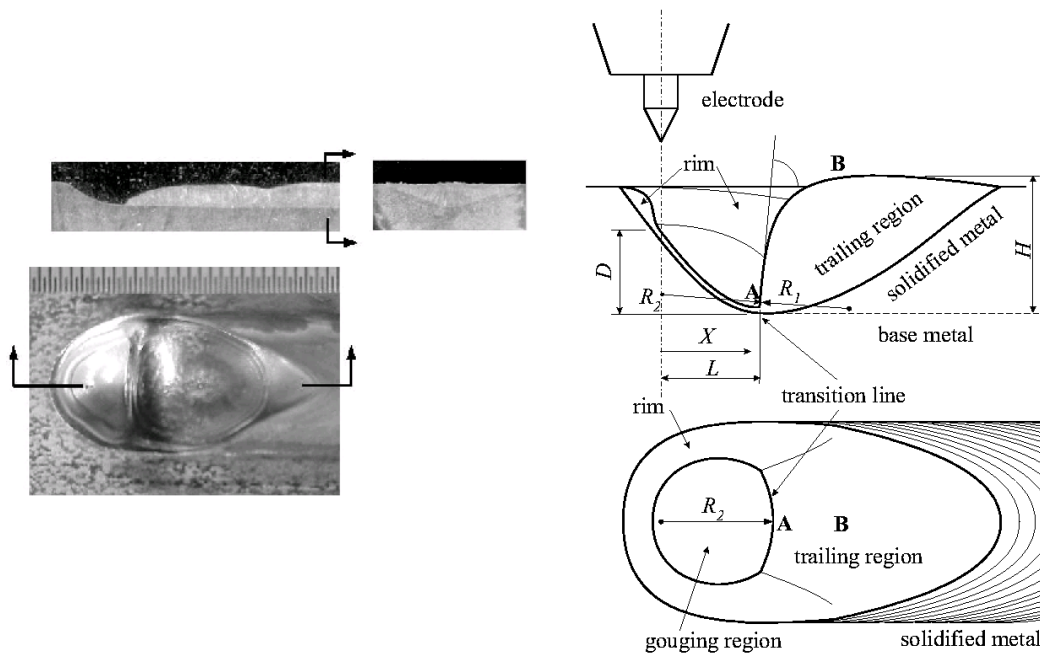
Weld pool at high currents and speeds. The photograph on the upper left corner is a longitudinal section; the one on the upper right corner is a cross section; and the photograph at the bottom, a top view of a weld in which the welding current was suddenly cut off. The schematic shows that the free surface is very depressed, turning into a thin liquid film under the arc. A thicker rim of liquid runs around the edge of the weld pool carrying molten metal to the bulk of liquid at the rear of the weld pool. The transition line marks the abrupt change from the thin liquid film into the bulk of liquid at the rear.
